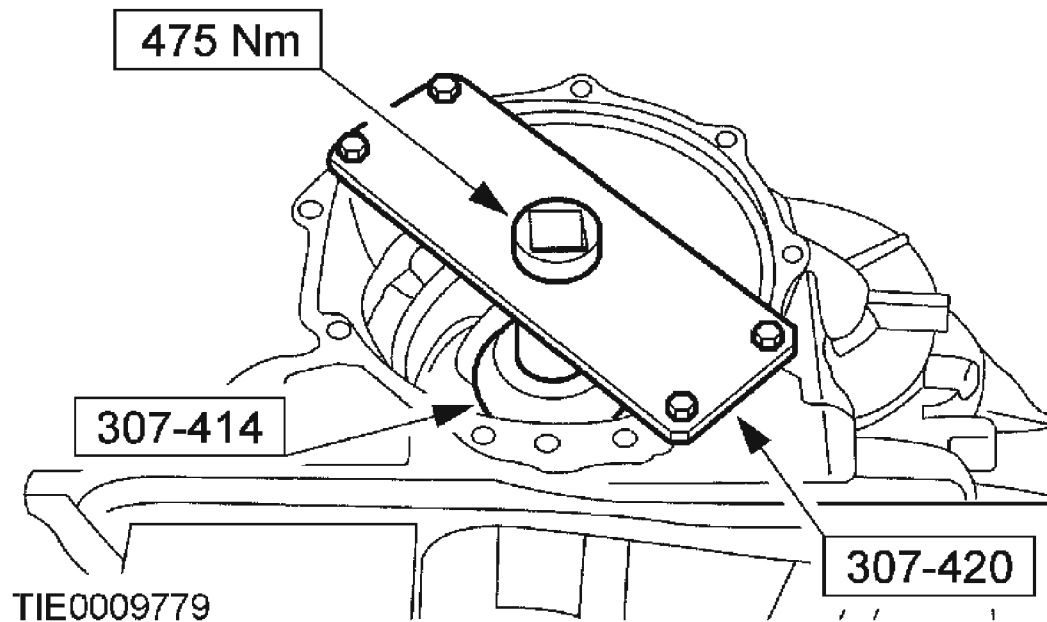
Removing Final Drive Input Gear Bearing Retainer Nut Using Special Tool
